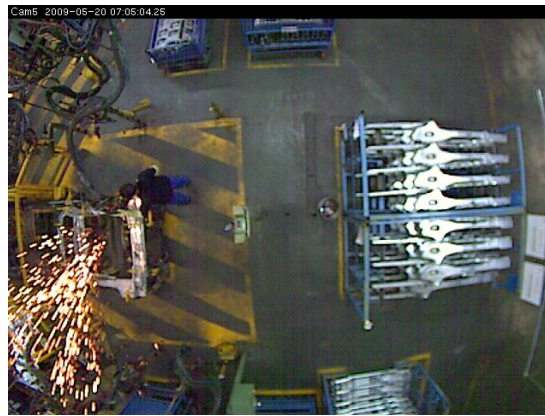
Cluttered background: Sparks in the background due to welding machine.
